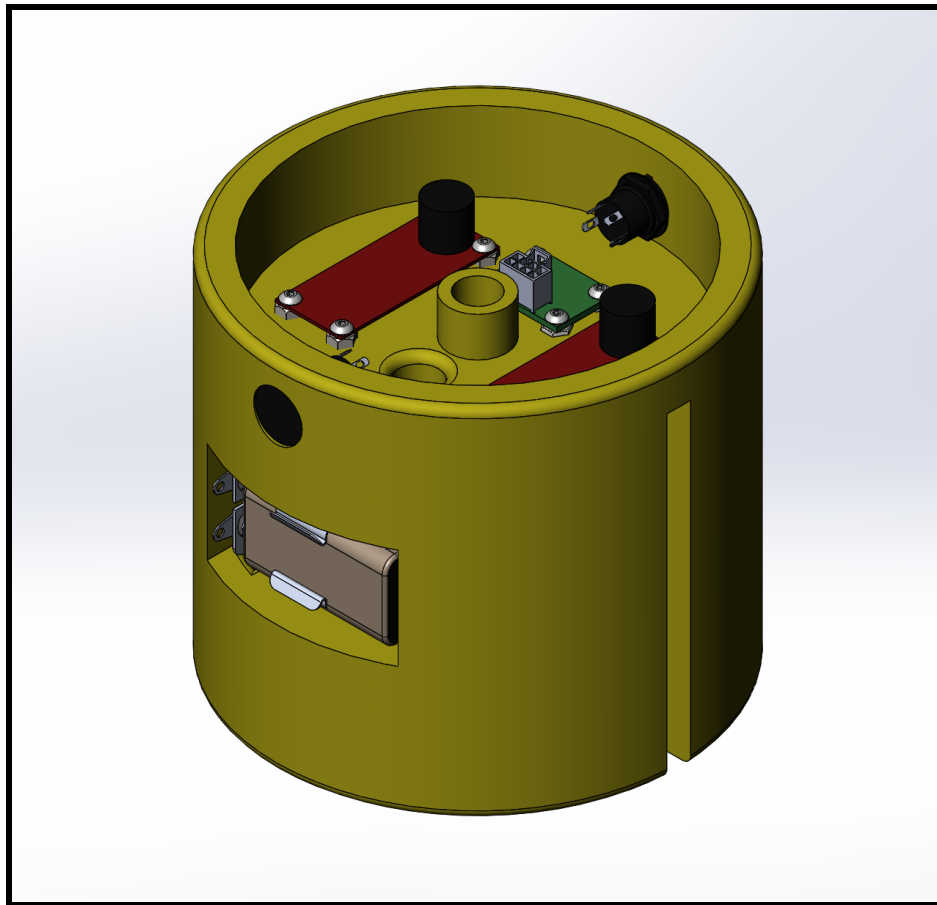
Avionics Section Avionics Assembly Isometric Top View
